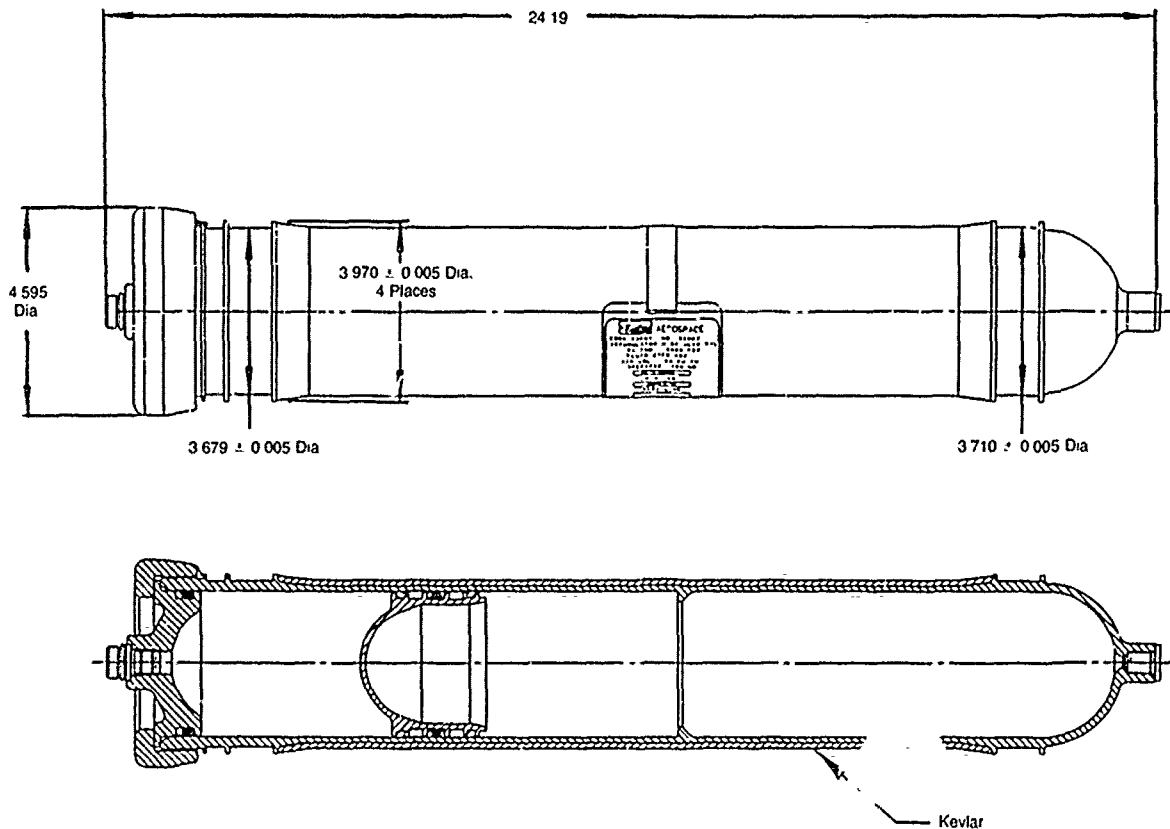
Parker - 8000 psi Accumulator Outline/Detail Drawing
